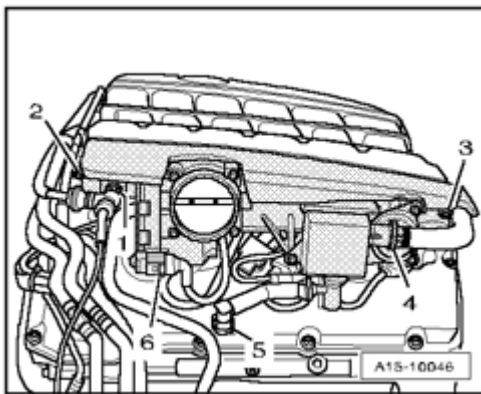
Vacuum Hose, Bolts, Crankcase Breather Hoses & Throttle Valve Control Module J338
